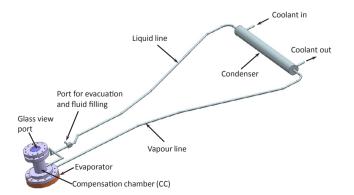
Three-dimensional view of the miniature LHP assembly.
